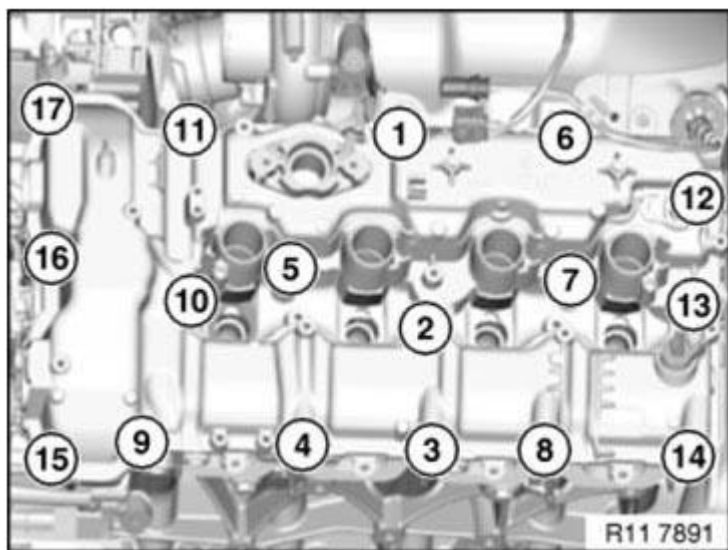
Identifying Cylinder Head Cover Bolts Releasing Sequence
